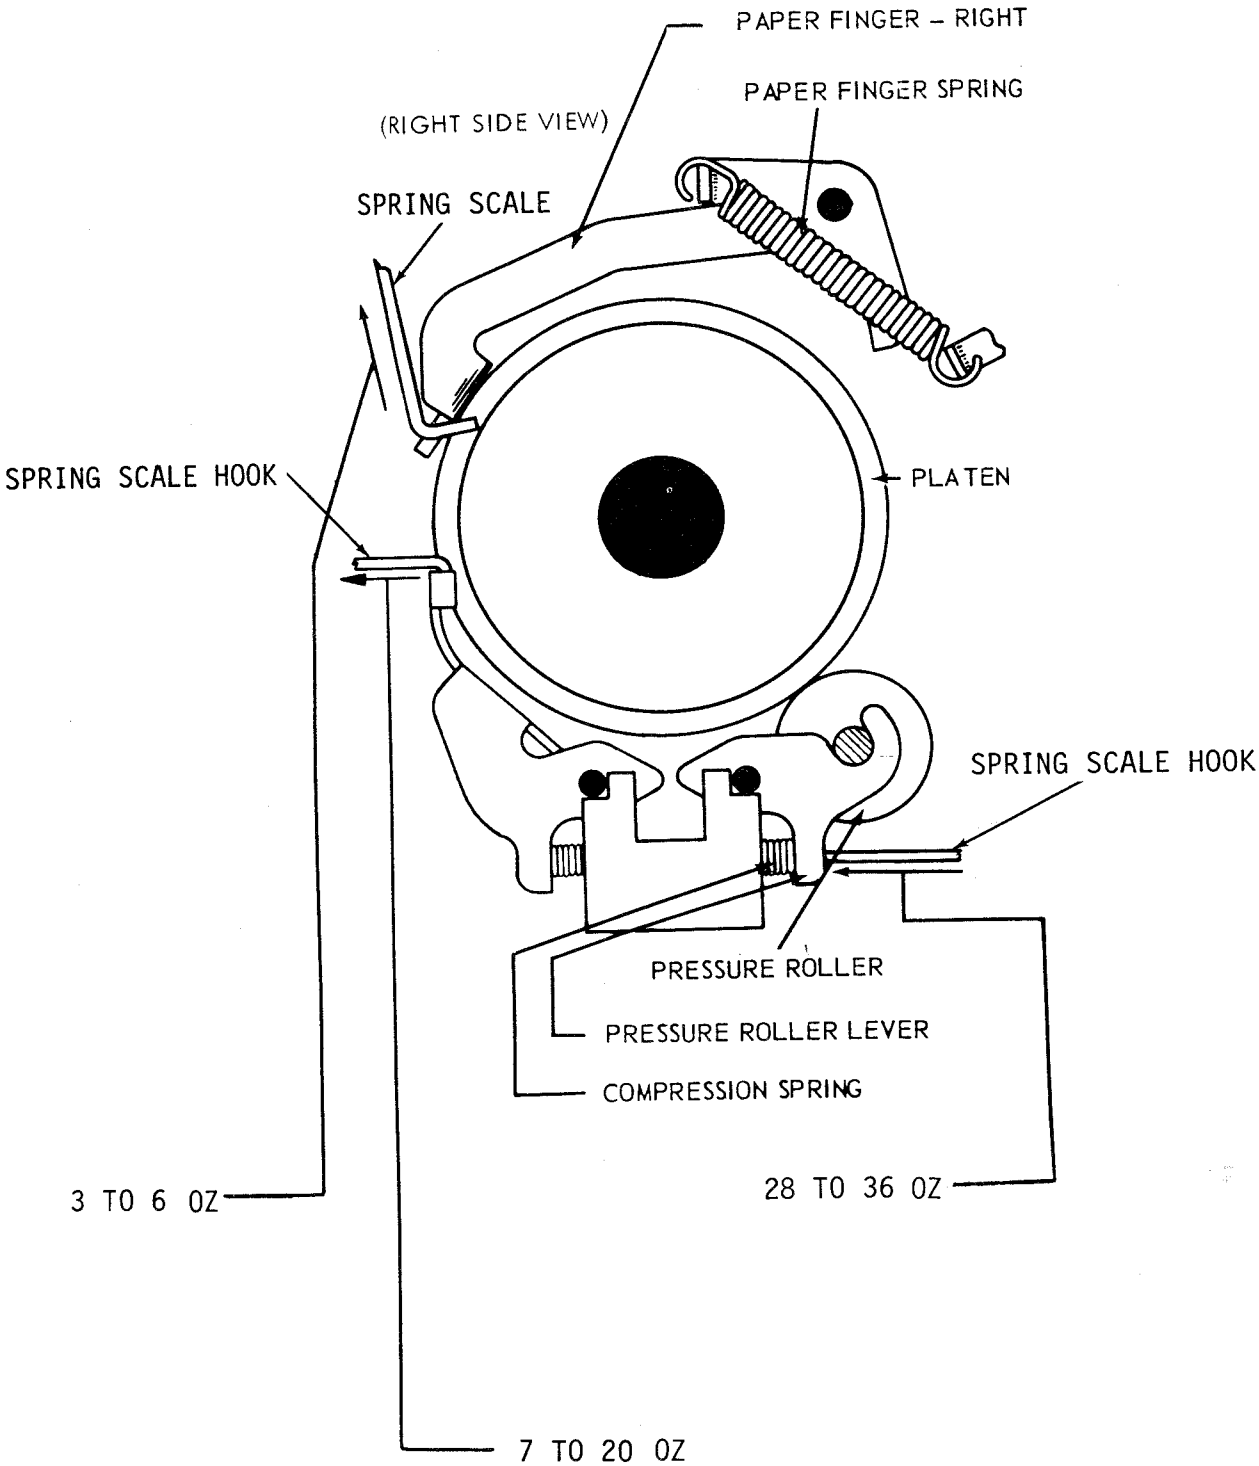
Paper Finger Spring, Paper Pressure Bail Spring, and Pressure Roller Lever Spring
